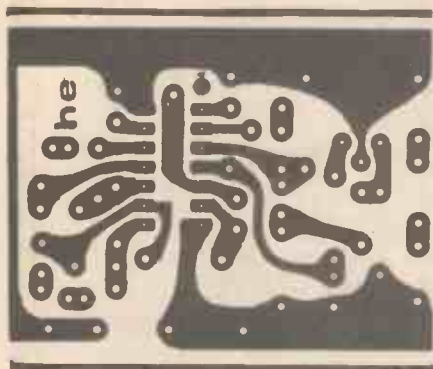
PCB foil pattern for GSR Monitor, take care when soldering in the IC's to prevent solder blobs.
